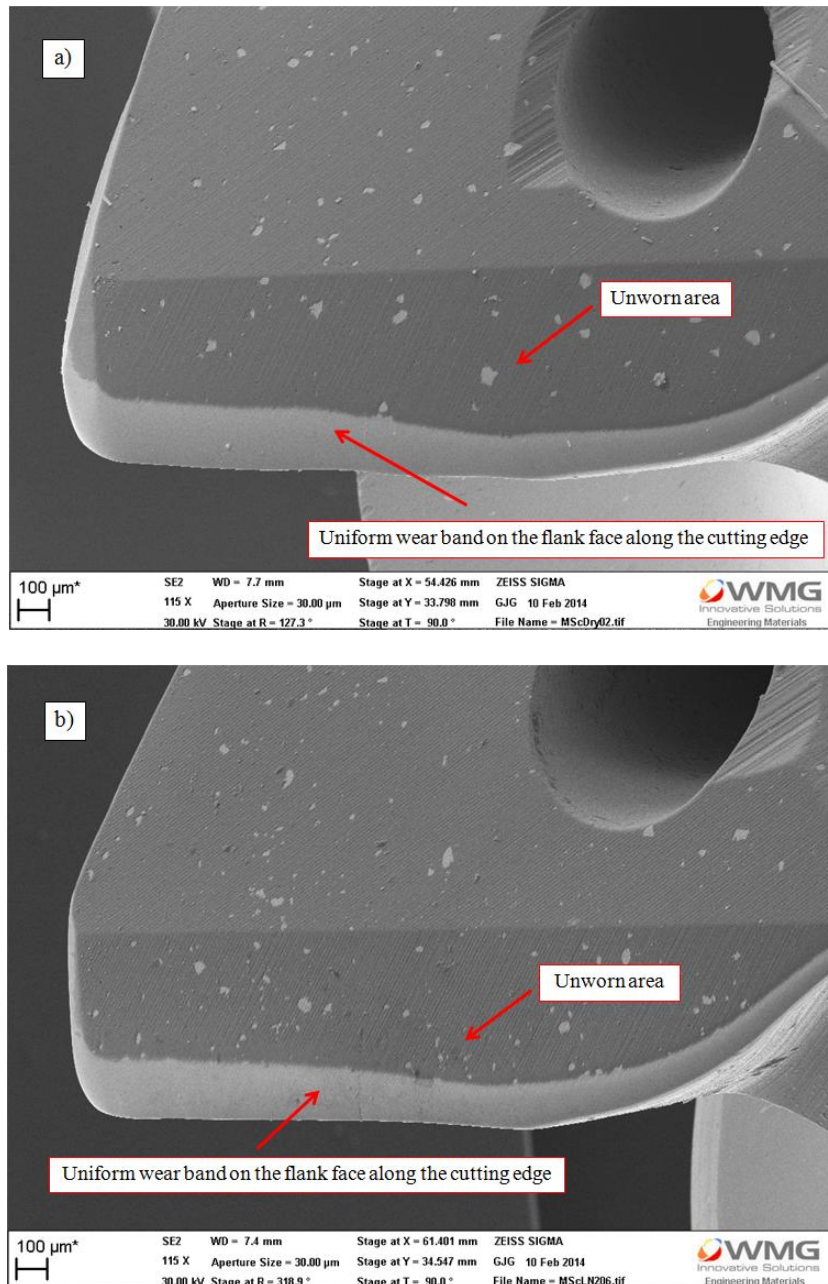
SEM images showing the uniform wear band along the cutting edge on flank face of the tool after drilling 325 through-holes in CFRP plaque (a) when machined dry at room temperature and (b) with a LN₂ pre-cooled tool
